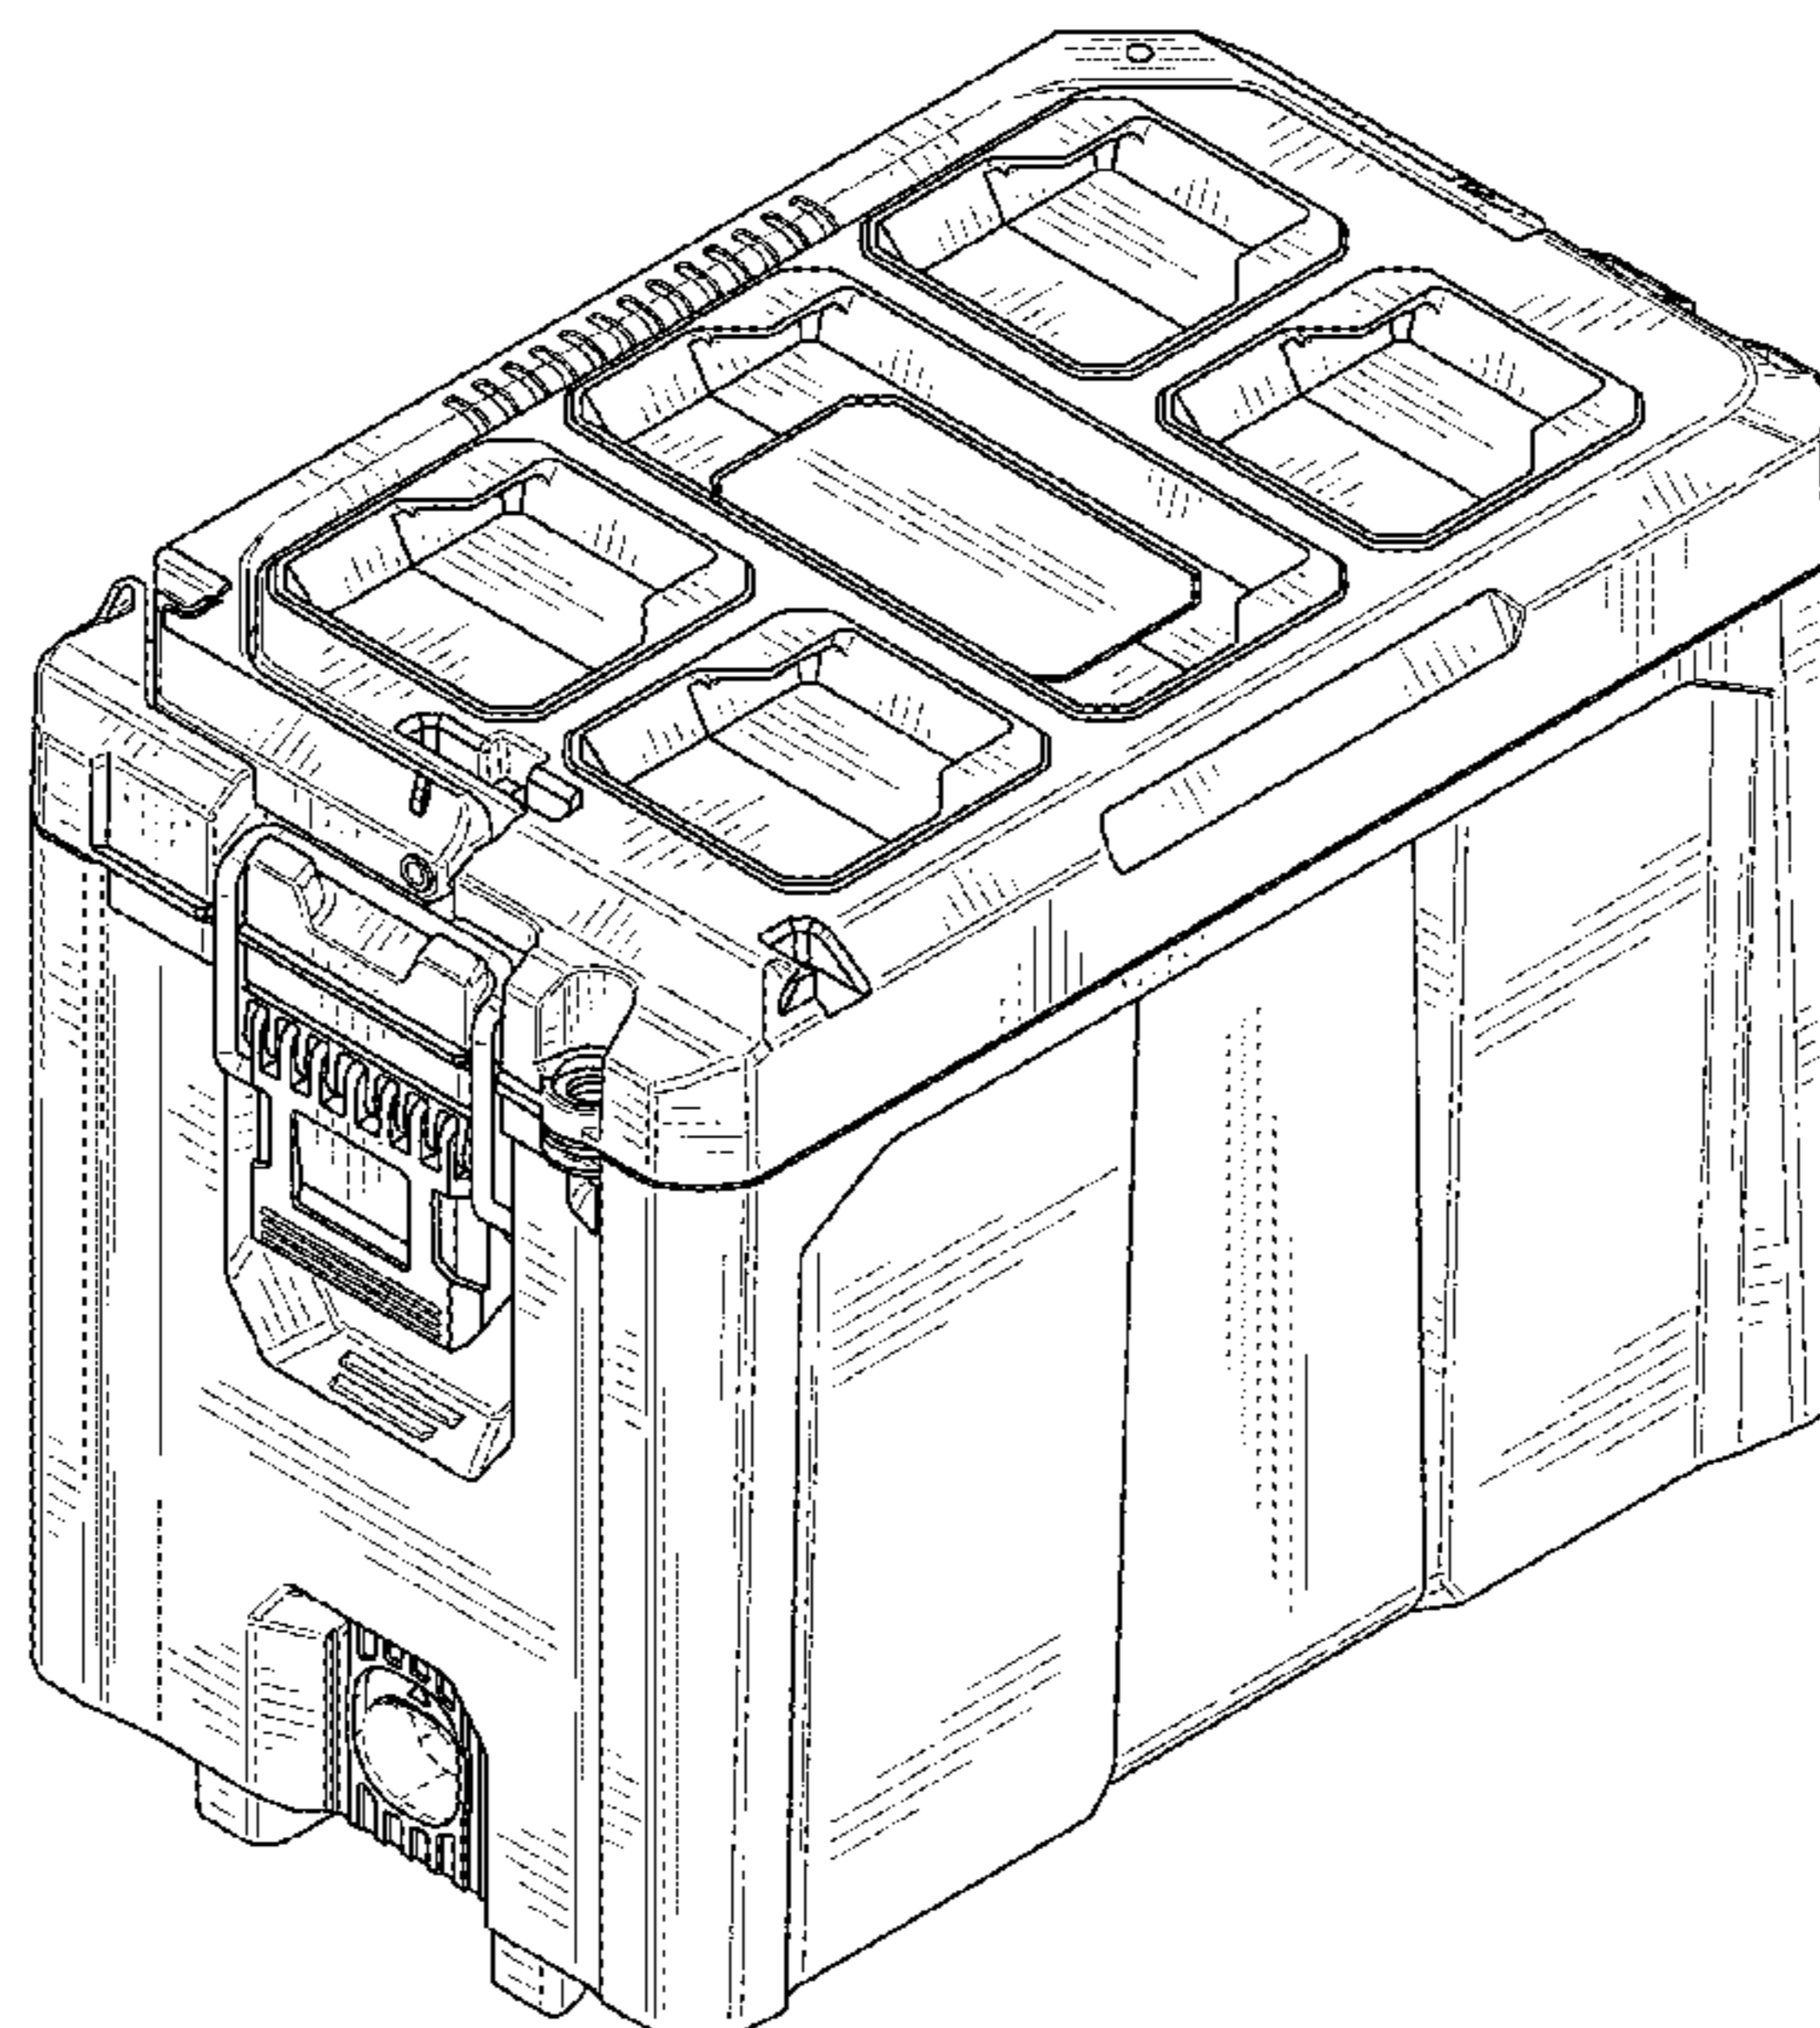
is a top and front isometric view of a new design for a toolbox;
